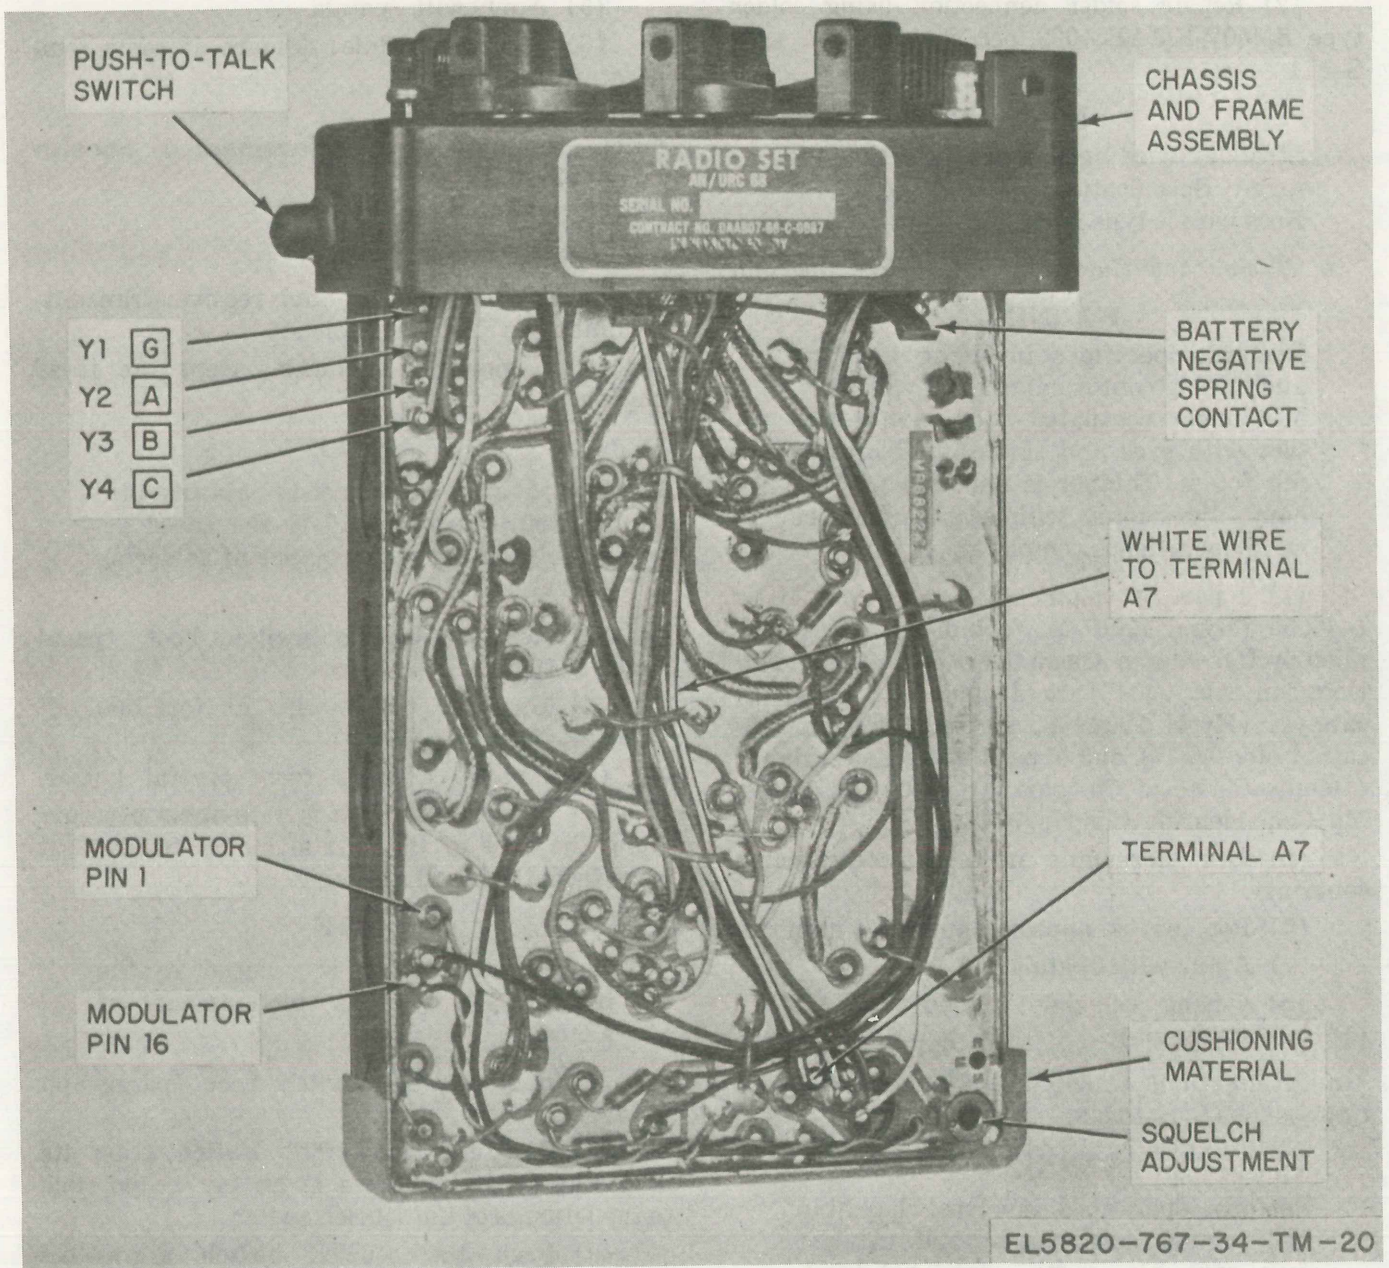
Receiver-transmitter unit, printed circuit board.
